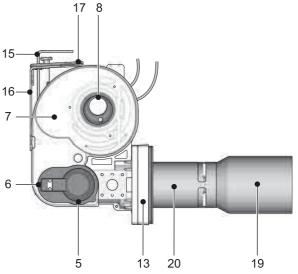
Oil burner - side view from the right for legend see fig. 7-1
